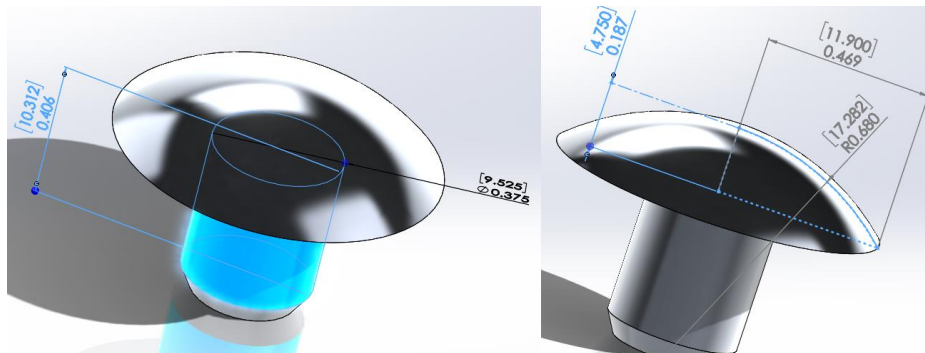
Brazier Head Panel Rivet, (3/8)" x 0.406 w/ 30[deg] x 0.06[in] Chamfer
